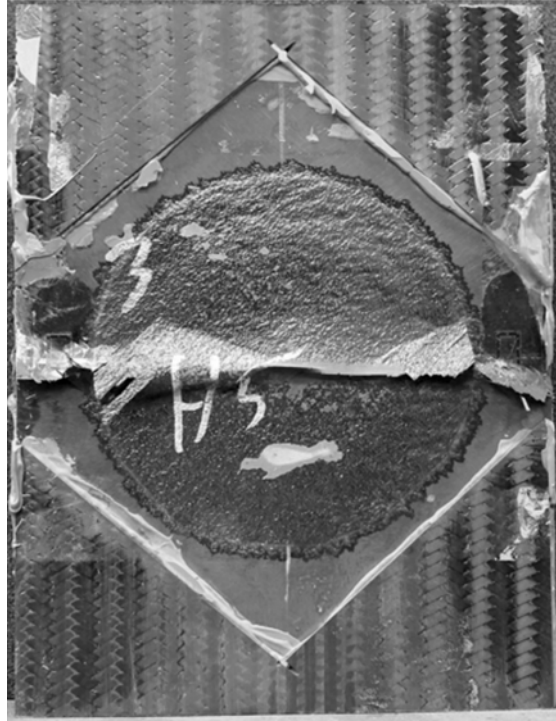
Photograph of compression failure of patch repaired specimen without removing damage.
